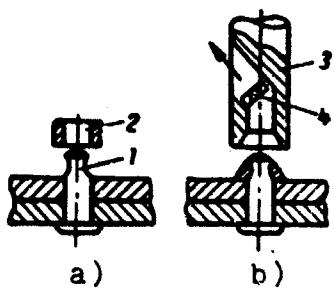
Diagram of the riveting process using rivets with high shear strength: 1 - body of rivet; 2 - ring from aluminum alloy; 3 - set; 4 - removal of (excess) material of ring.
